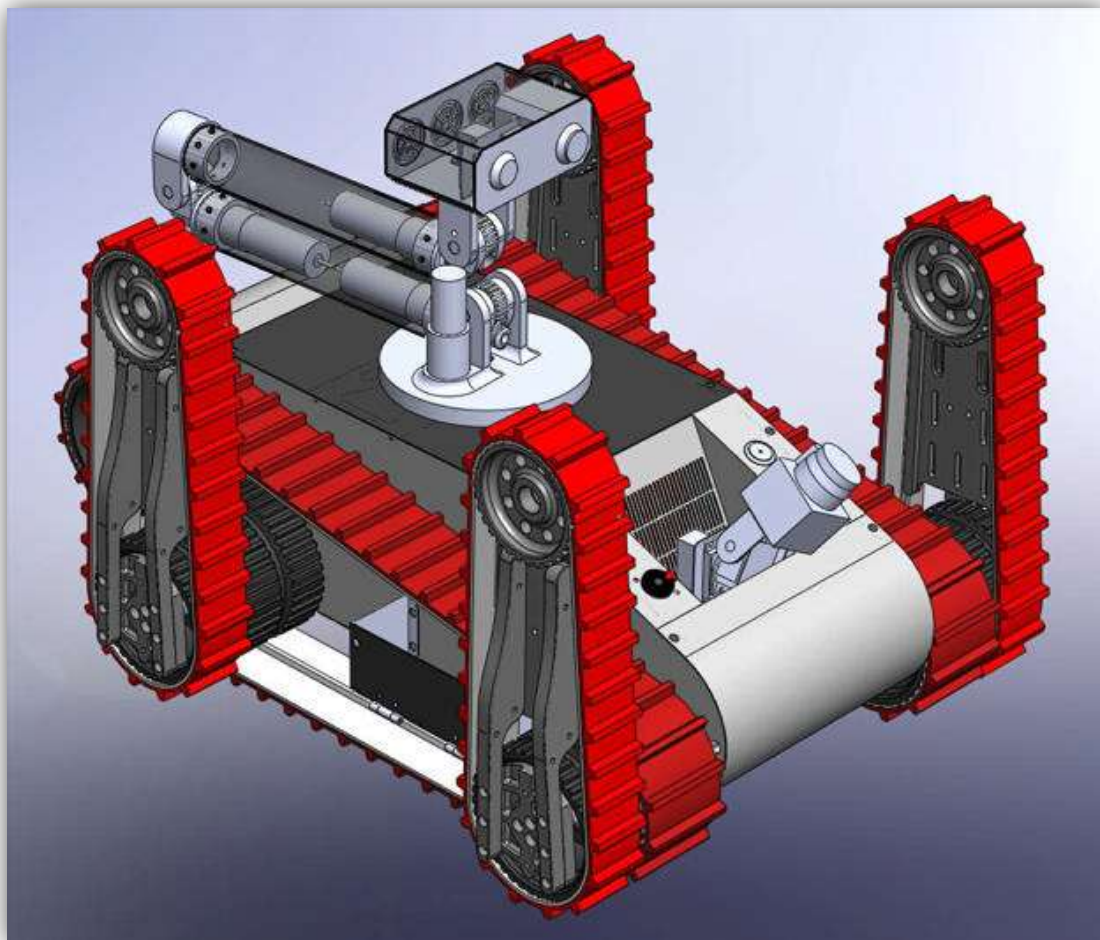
Warwick Mobile Robotics SolidWorks Model showing Worm Joints [56]
